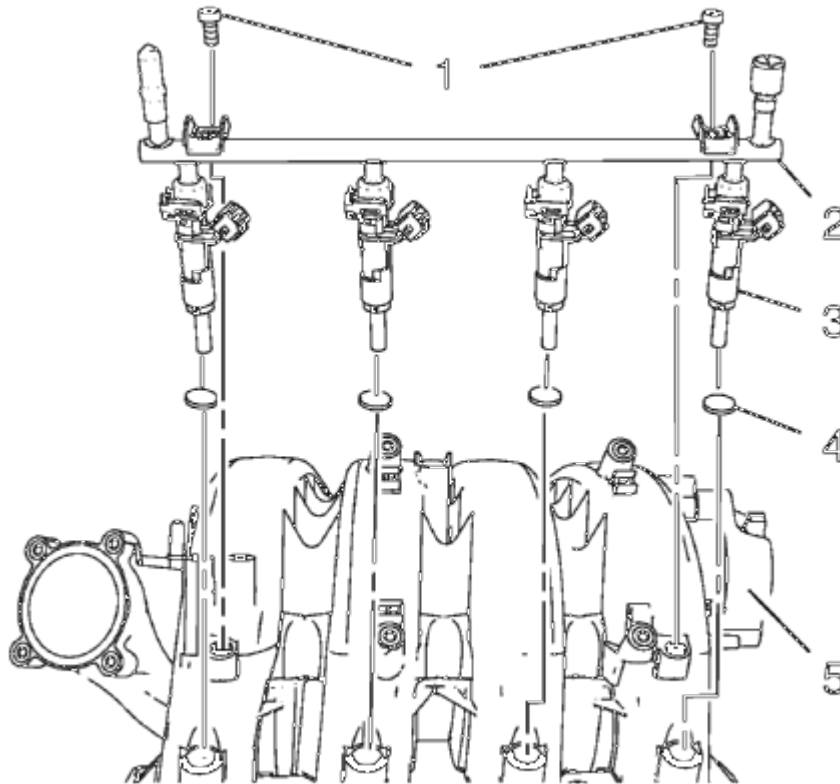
Intake Manifold, Multiport Fuel Injection Fuel Rail, Fuel Injectors, Seals And Bolts
